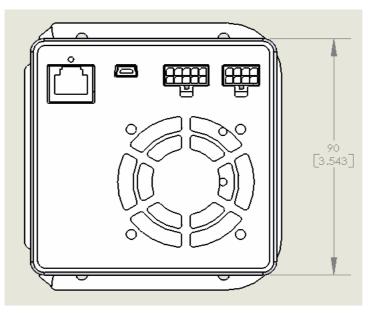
Enclosed Body (Type D) with Split Flange (Type C) - Back View
